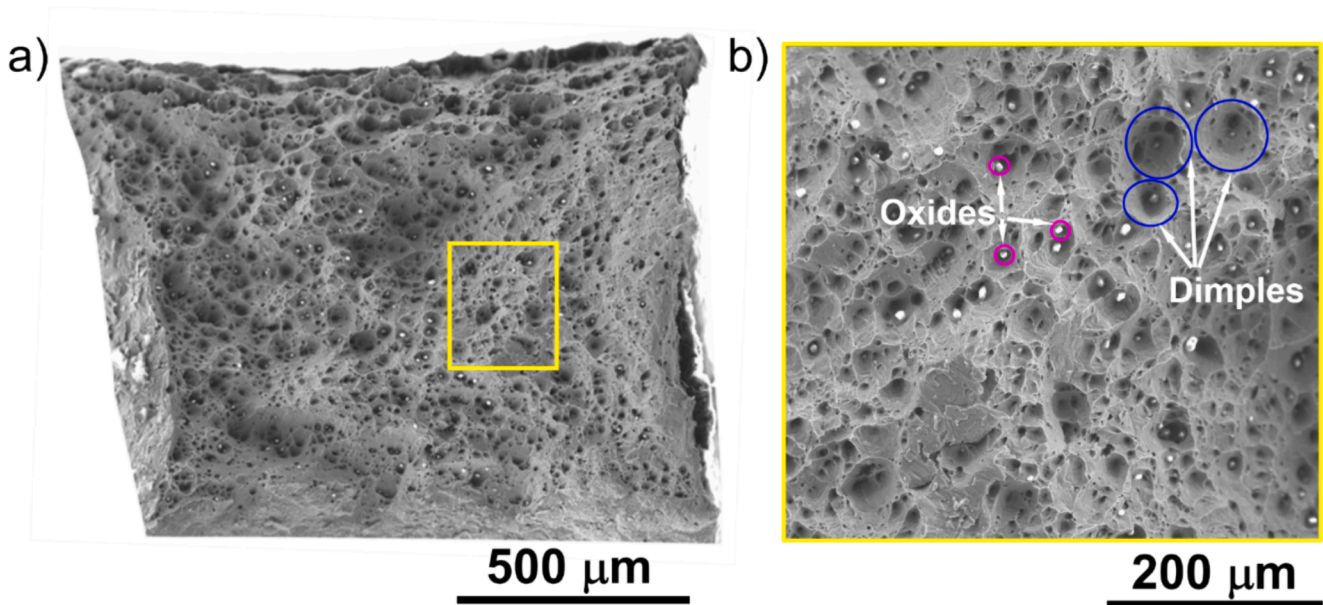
Fractography of the welded joint: a) overview of a fractured sample; b) close-up highlighting a ductile-like morphology and dimples of the fracture surface.
